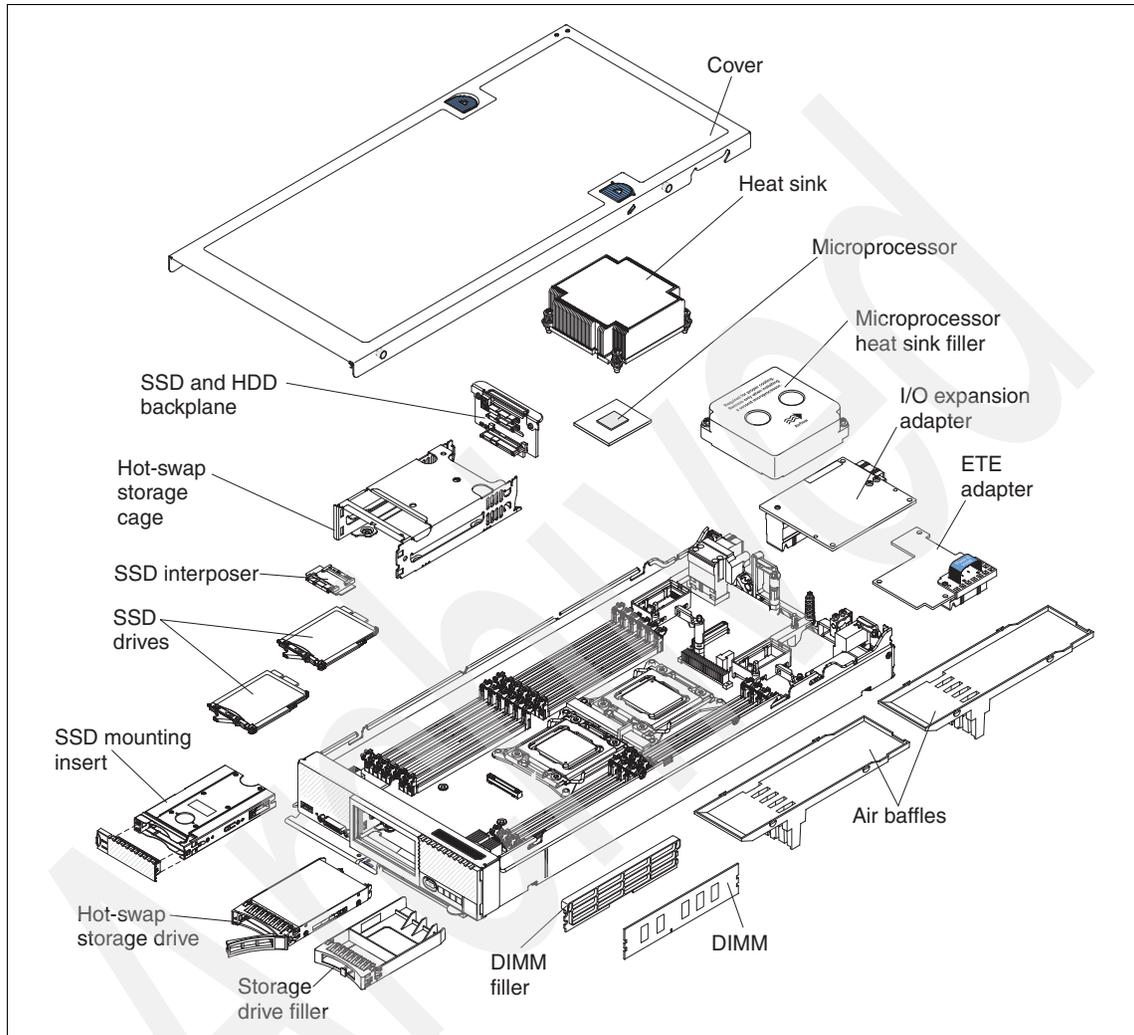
Exploded view of the IBM Flex System Manager node showing major components
